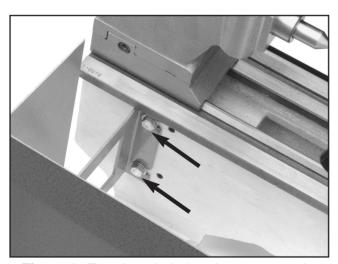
Two hex bolts/washers secure the right-hand side of the backsplash to the lathe.
